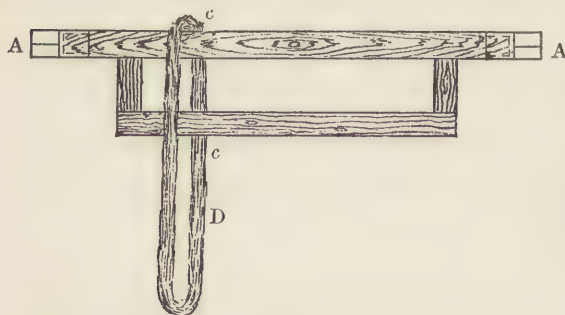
Dye-stick for Corron's yarn-dyeing machine.
